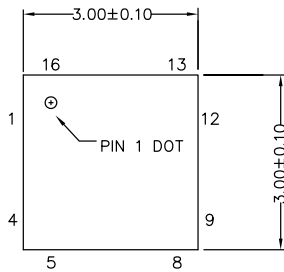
16-pin Chip-On-Lead (3 × 3 × 0.6 mm) (Sawn) Package Outline, 001-09116
